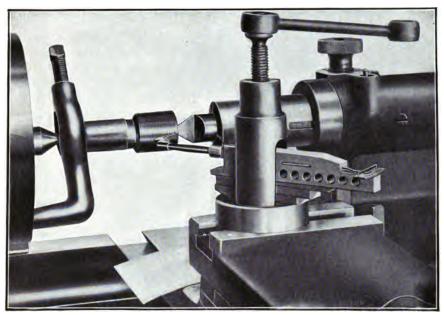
TESTING A THREADED PLUG IN THE LATHE
